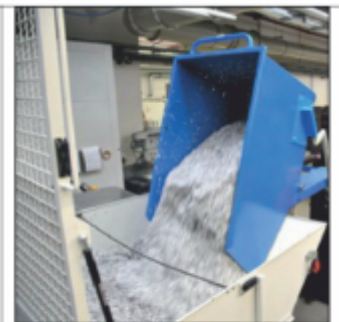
Aluminium chips are collected, transported to the briquetting press and emptied into a hopper with a forklift at Zollner.
